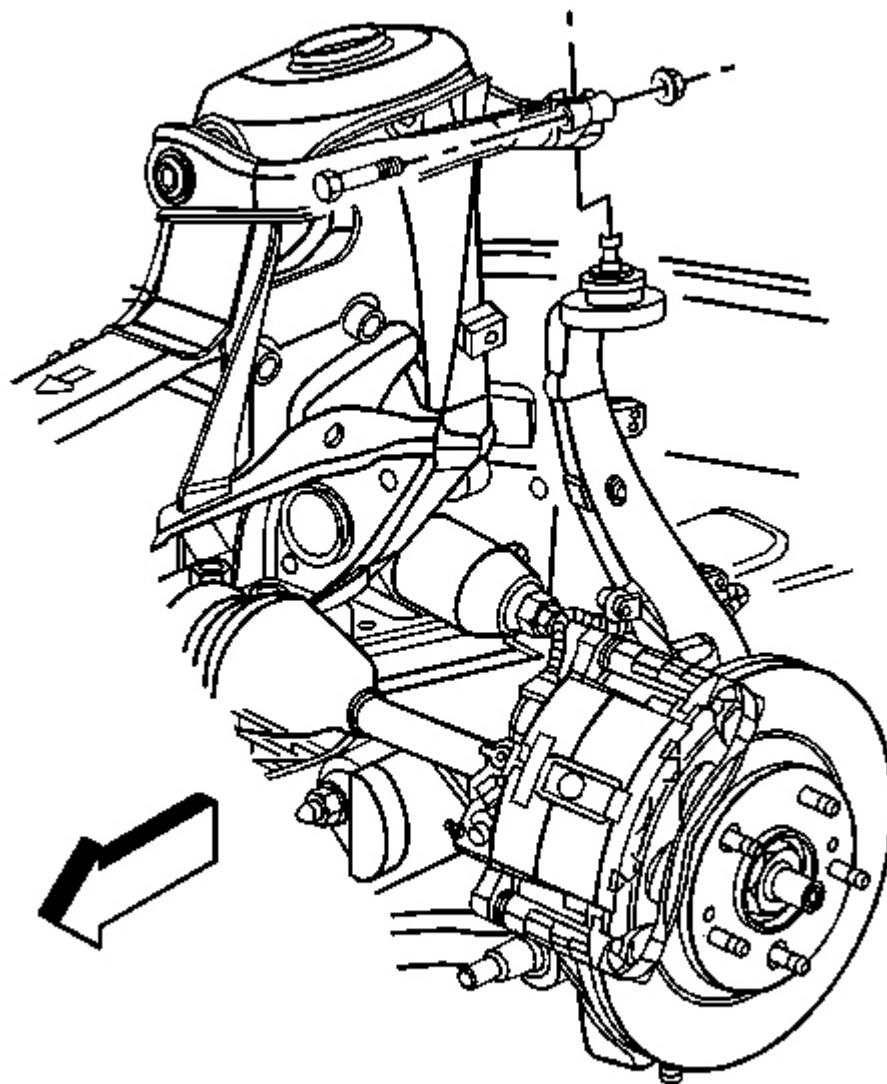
Identifying Lower Ball Joint Retaining Nut
